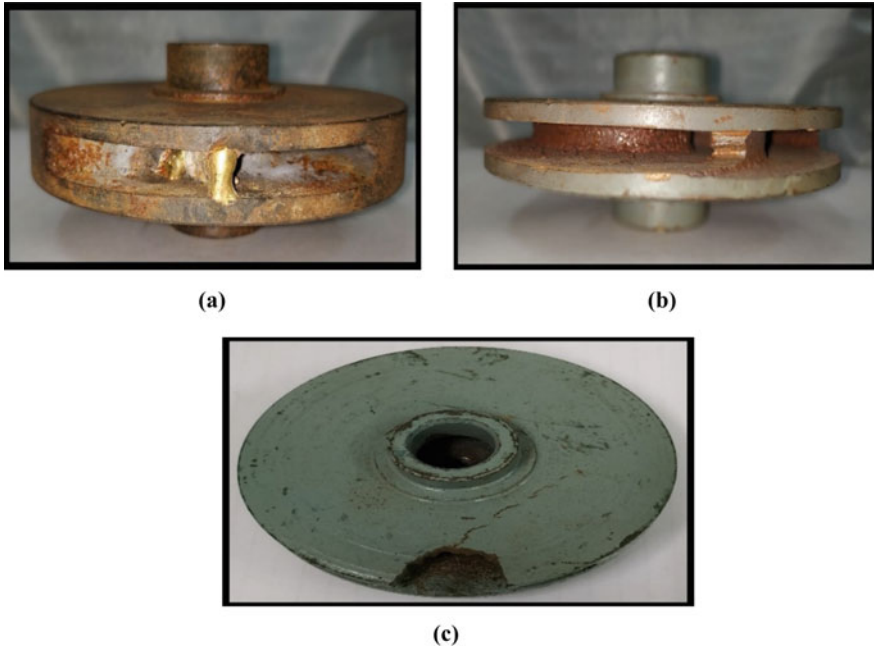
Different health conditions of impeller a clogging, b blade cut and c wheel cut
